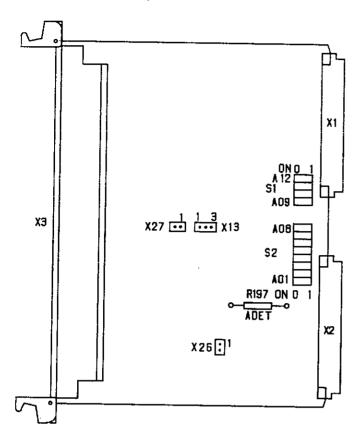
Component side (top view) with the printed board GJR5145711P1 (solder side)
